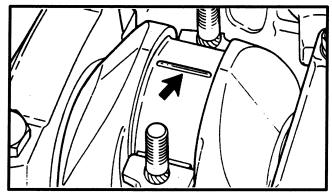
PLASTIGAGE® ON A BEARING JOURNAL
